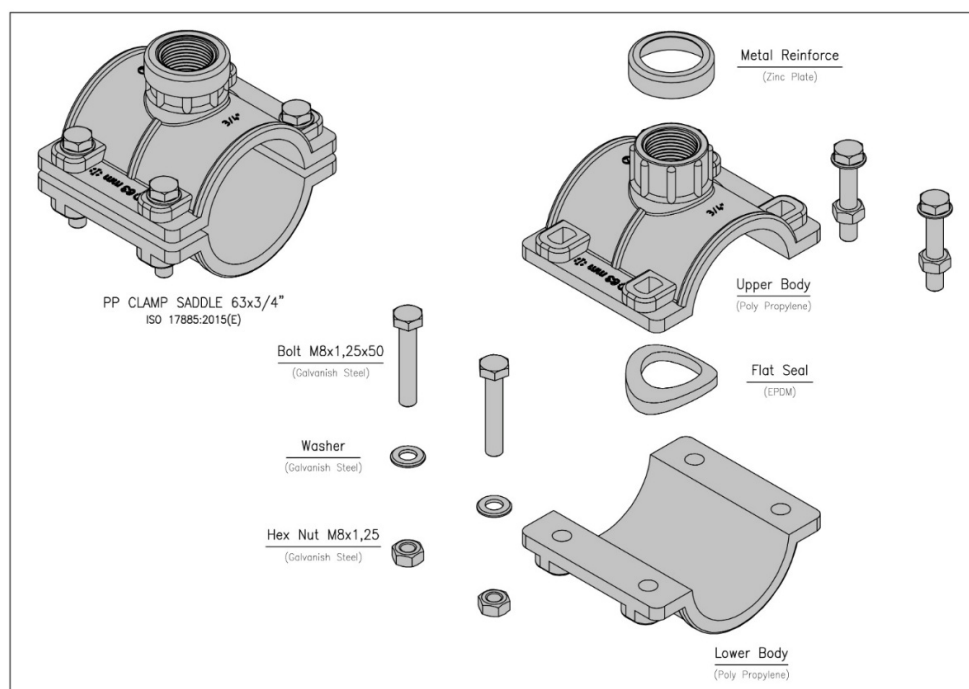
Own-brand Clamp Saddle Technical Drawing (R&D)
